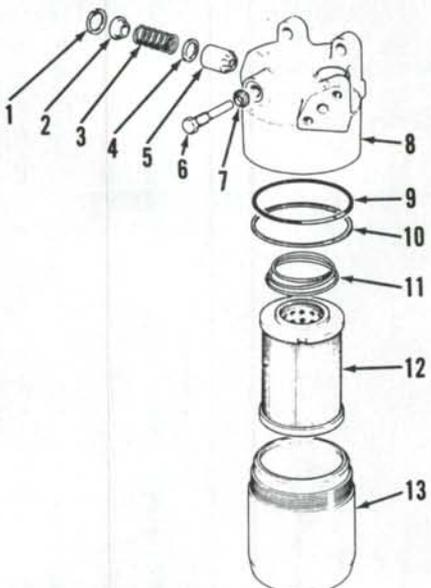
Exploded view of hydraulic system pressure filter used on some models.
